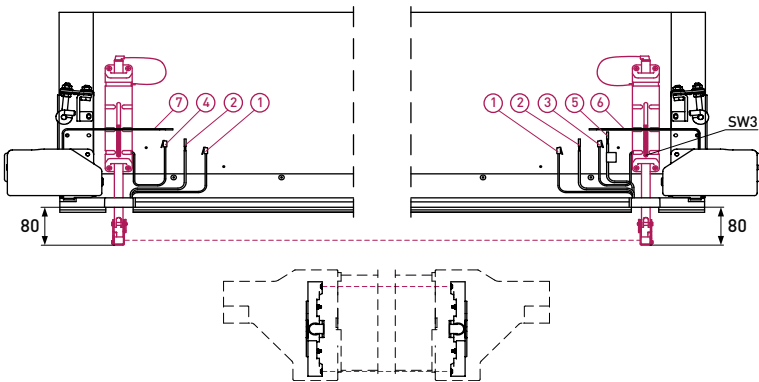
Position adjustment of the pin with sensor for PFS-200KIT
